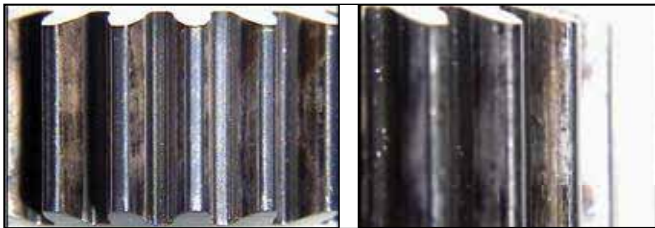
MoS₂ gearbox inspection after life test.
